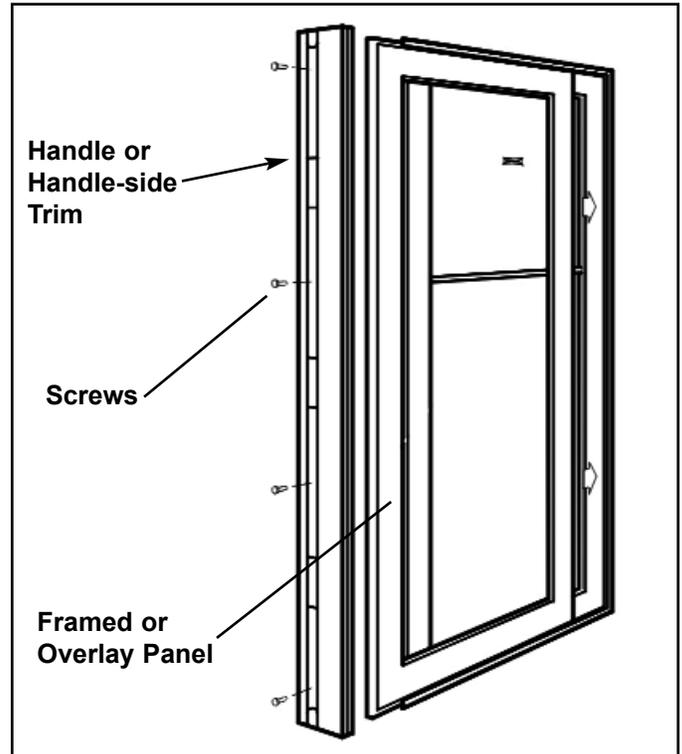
Model 430 Framed and Overlay Handle / Handle Side Trim & Door Panel Removal
